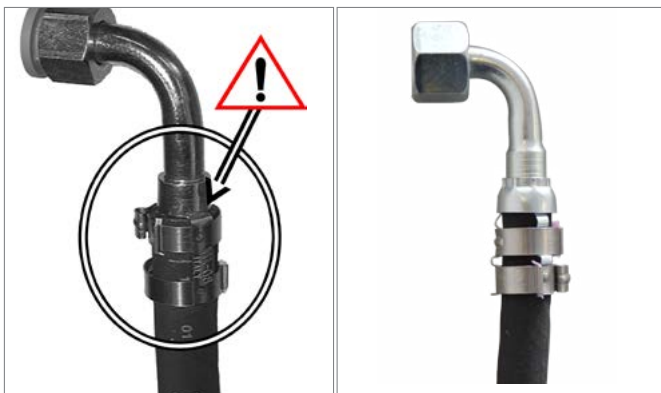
Check clamp and fitting Fig. 45: Fitting with inserted hose
